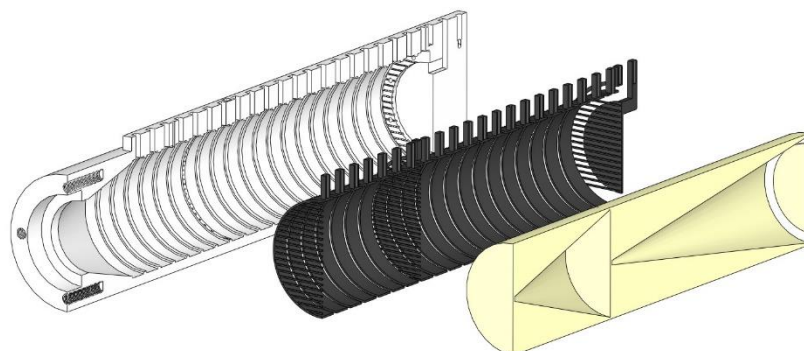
Dimetric and exploded cross section of the 28 cm single print unibody IMS drift tube showing (from left to right) insulating, conducting, and soluble layers.
